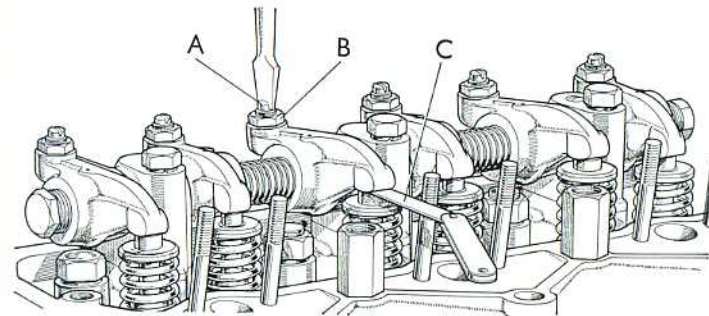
/9. SETTING THE VALVE CLEARANCE
